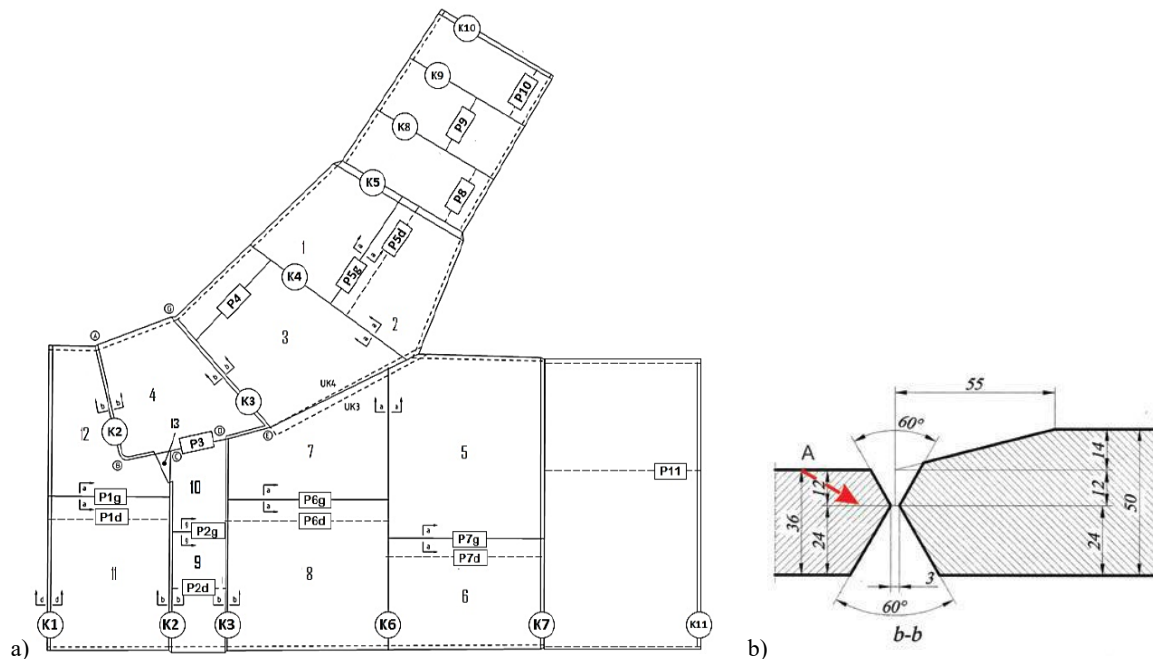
Branch of unit 6A: a) geometry, b) cross section of welded joint K3 [2]
